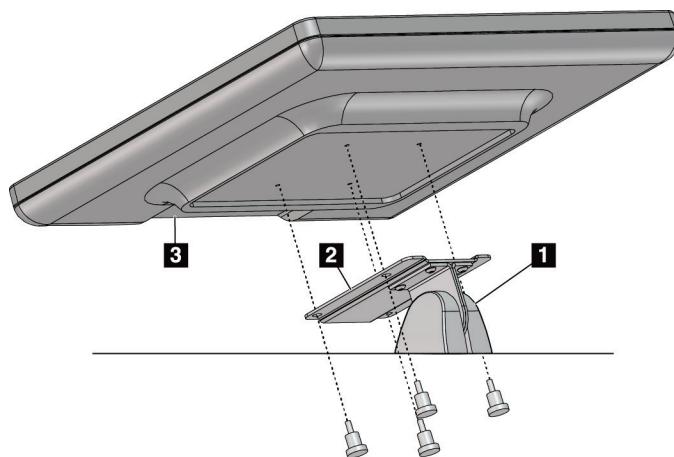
Attaching mount to tabletop, plate to mount, and monitor to plate
